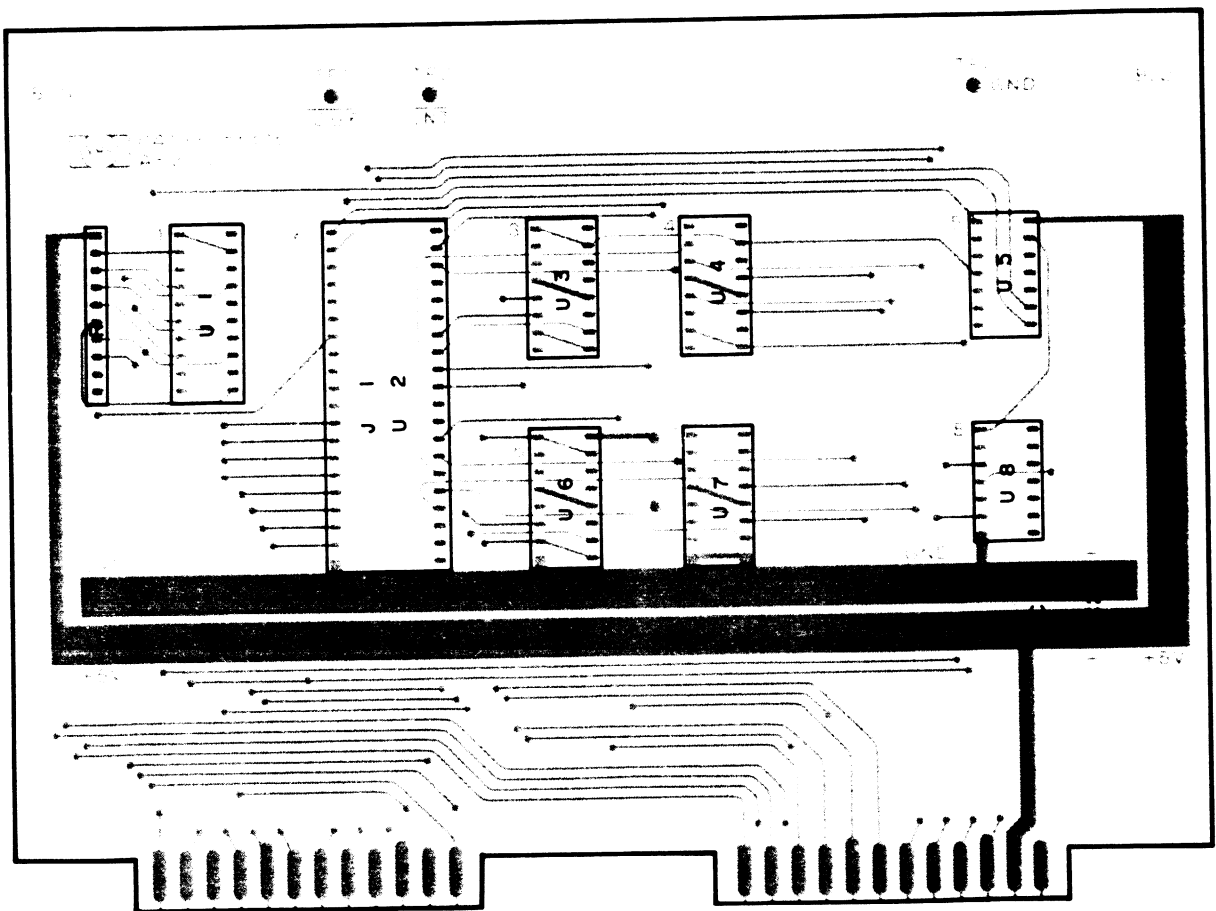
A16 HP-IB Board Assembly Component Locations.
